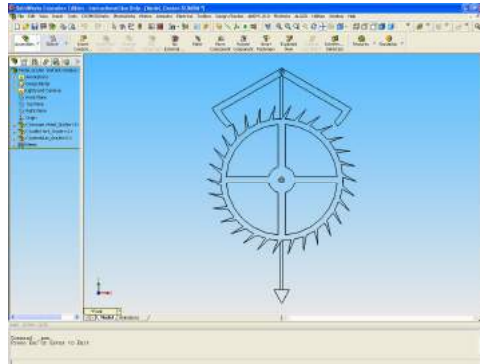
The assembly diagram of Graham Escapement in SolidWorks®
